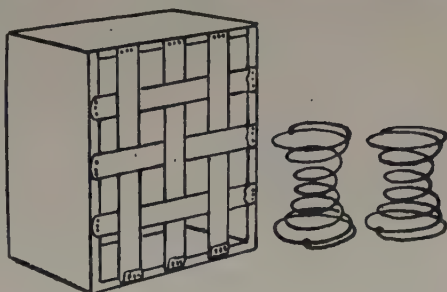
BOX WITH WEBBING FIXED, READY FOR SPRINGS TO BE SEWN.
